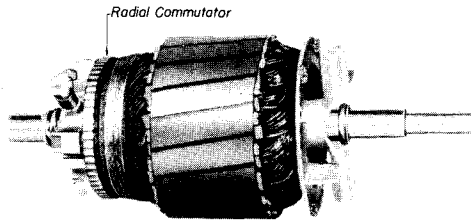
A rotor having a radial commutator with bars perpendicular to the shaft. (Wagner Electric Company.)
